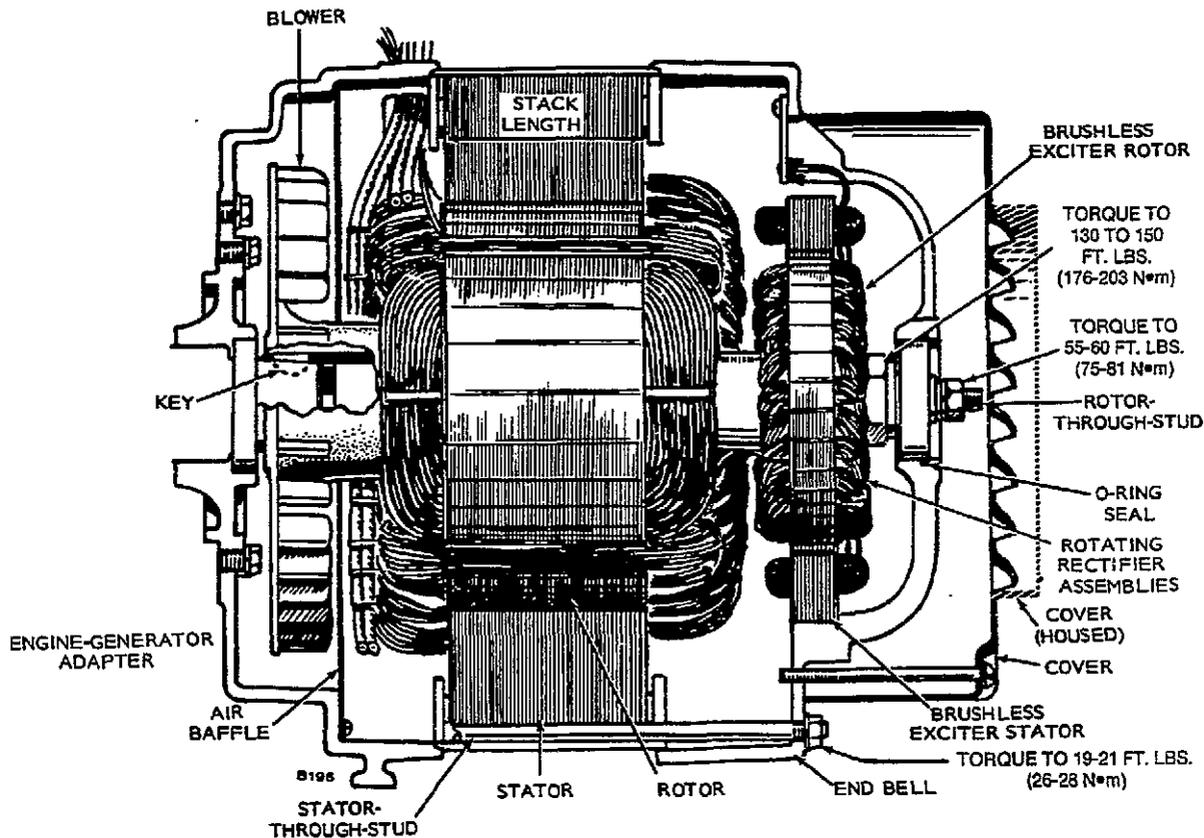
TYPICAL YD J-SERIES GENERATOR (SECTIONAL VIEW)
